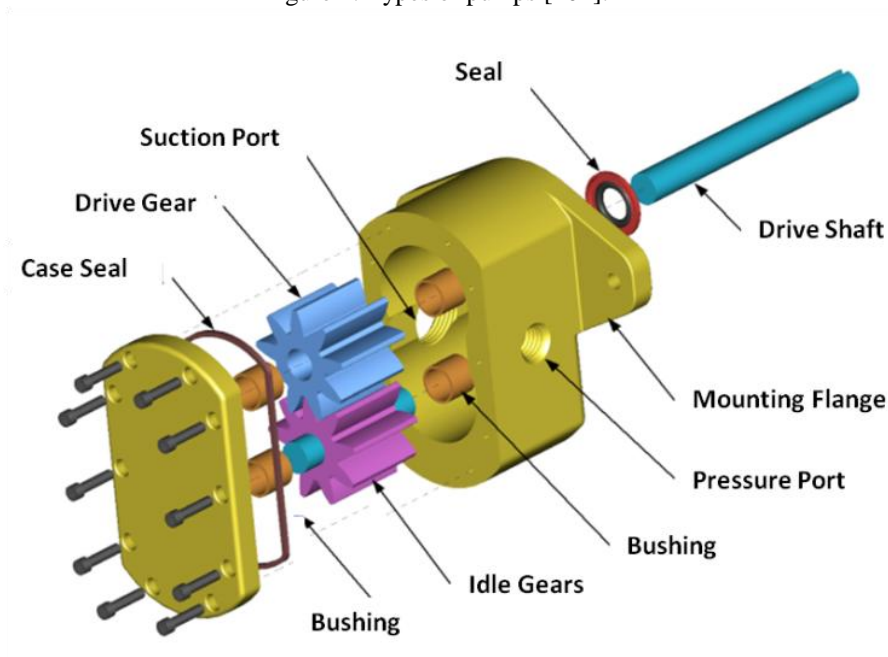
Assembly of the gear pump (https://en.wikipedia.org/wiki/Gear_pump).
